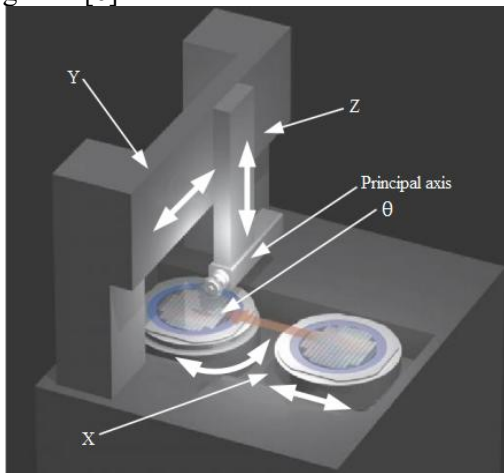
Schematic Diagram of Semiconductor Wafer Cutting Machine
